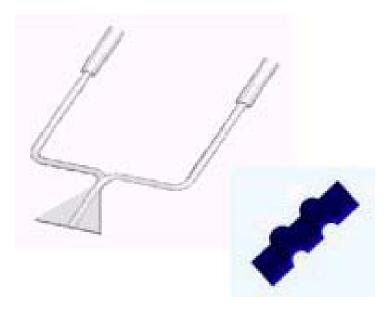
Sketch of the Braking Mechanism and Clasp for Attaching the Brake to the Sit-Ski Frame.
